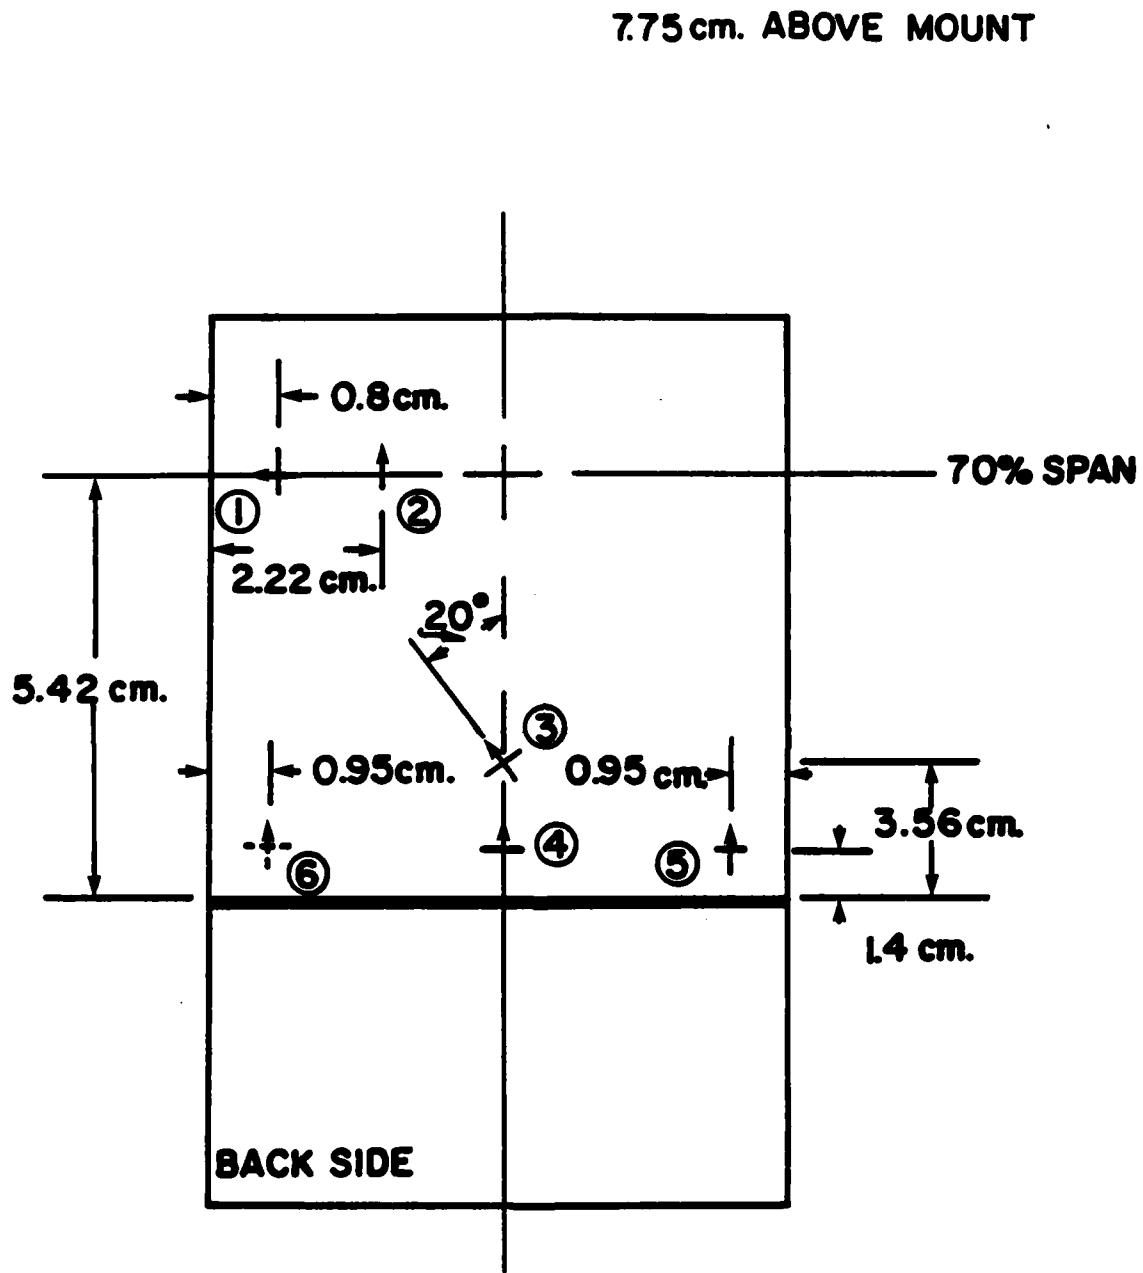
A. Strain Gage Locations for Group 15 Structural Element Test Specimens.
